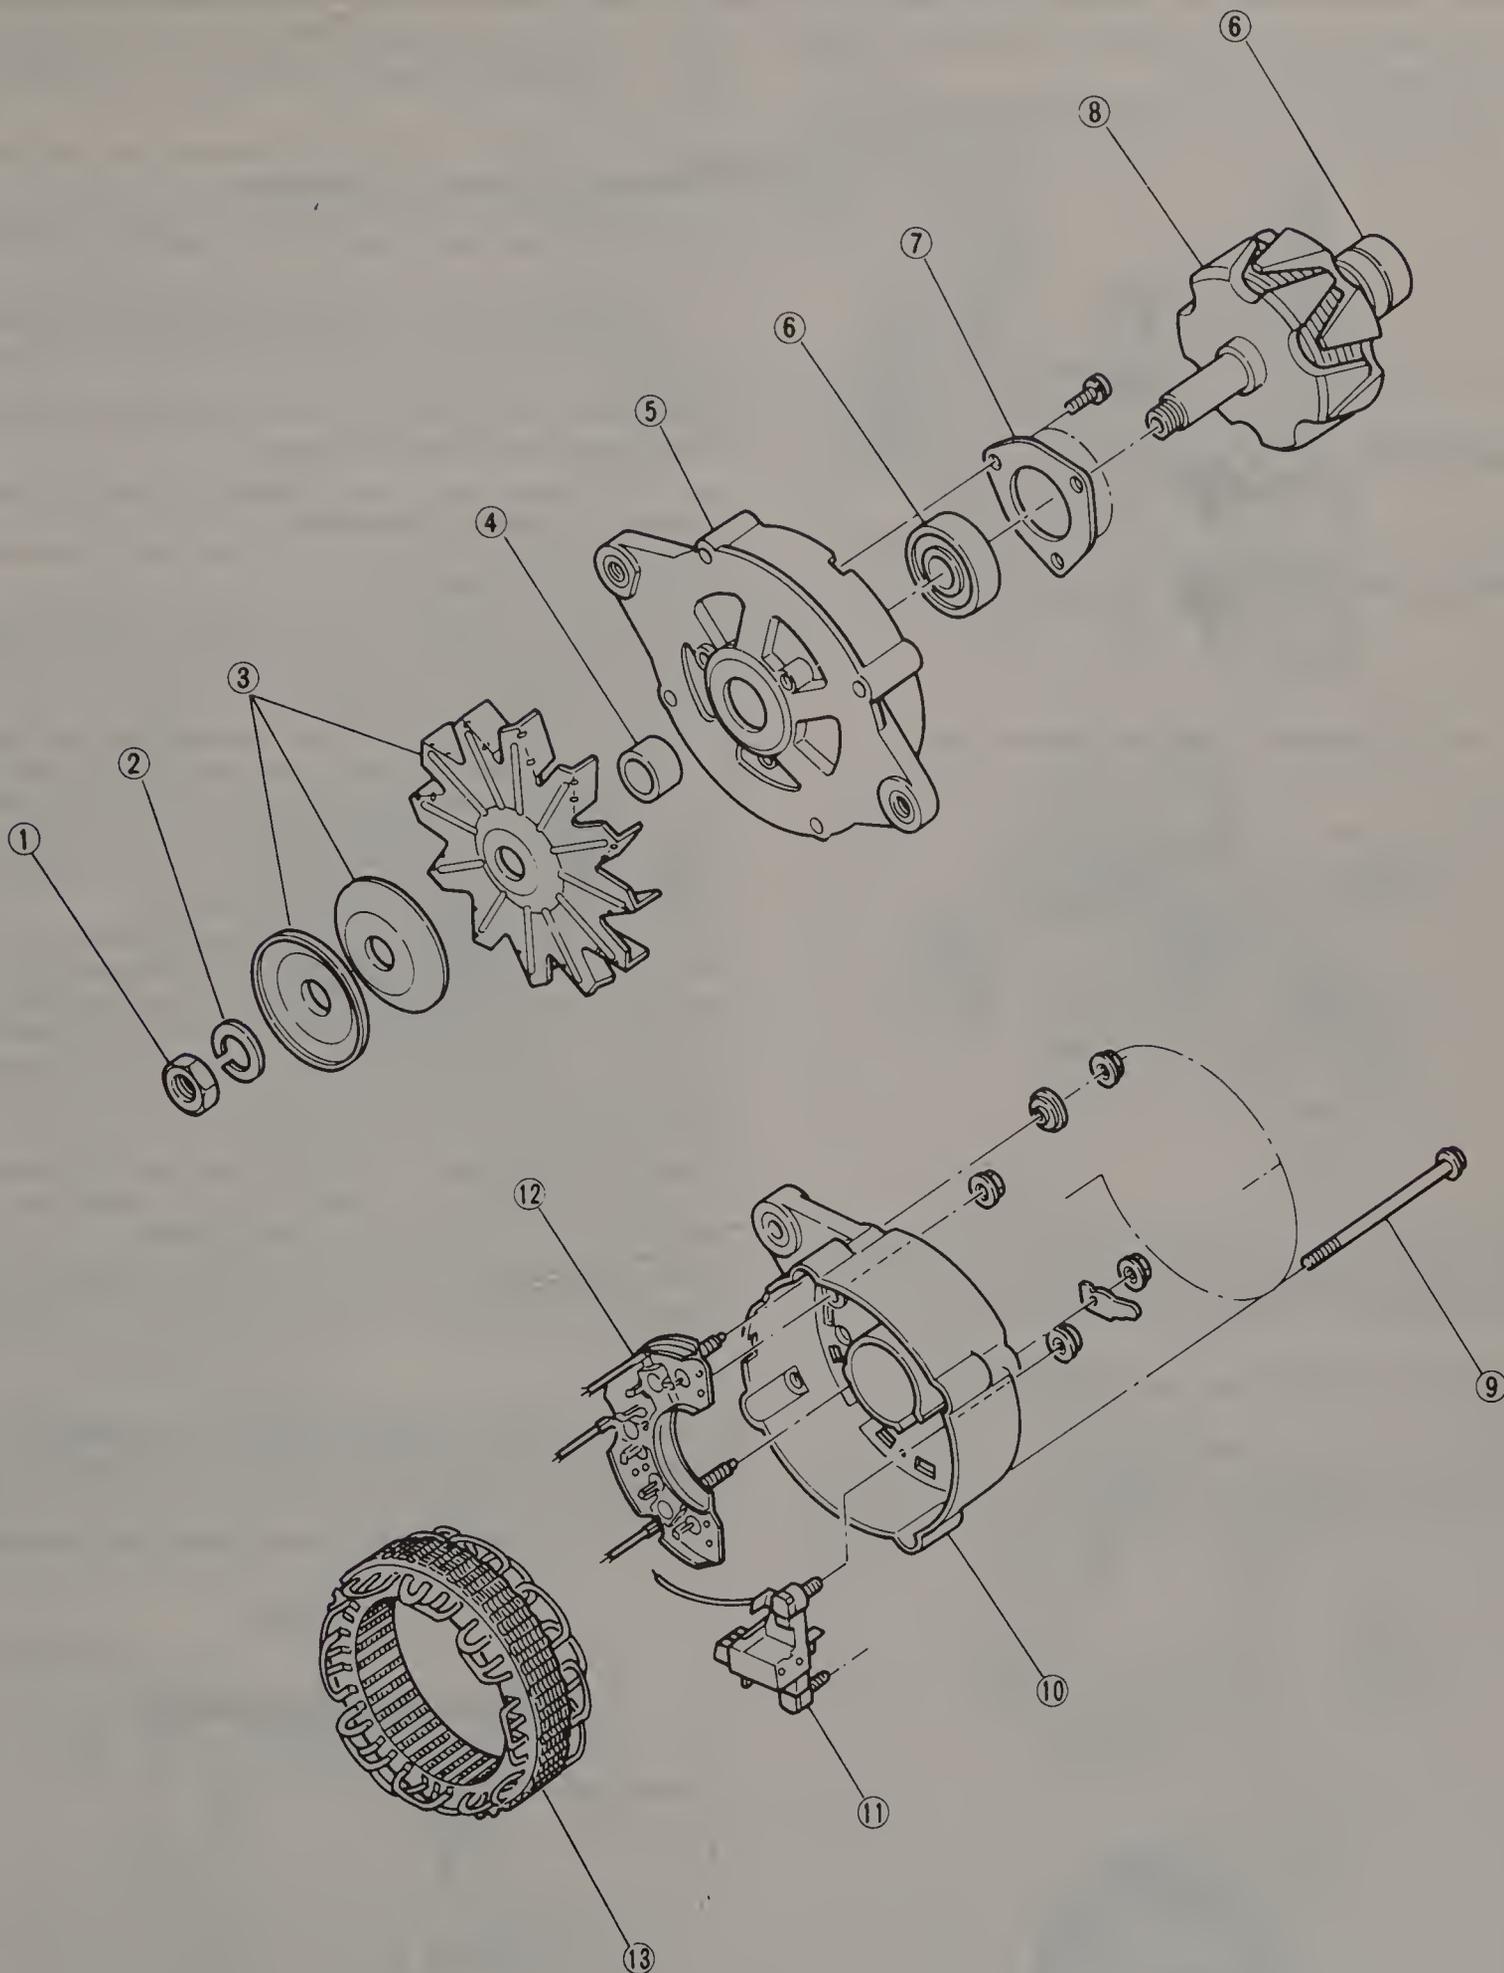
Alternator components (typical) – exploded view (Sec 20)
